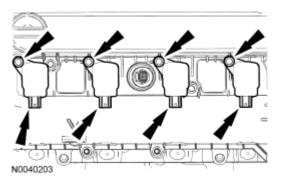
Locating Coil-On-Plug Assemblies And Bolts Courtesy of FORD MOTOR CO.
